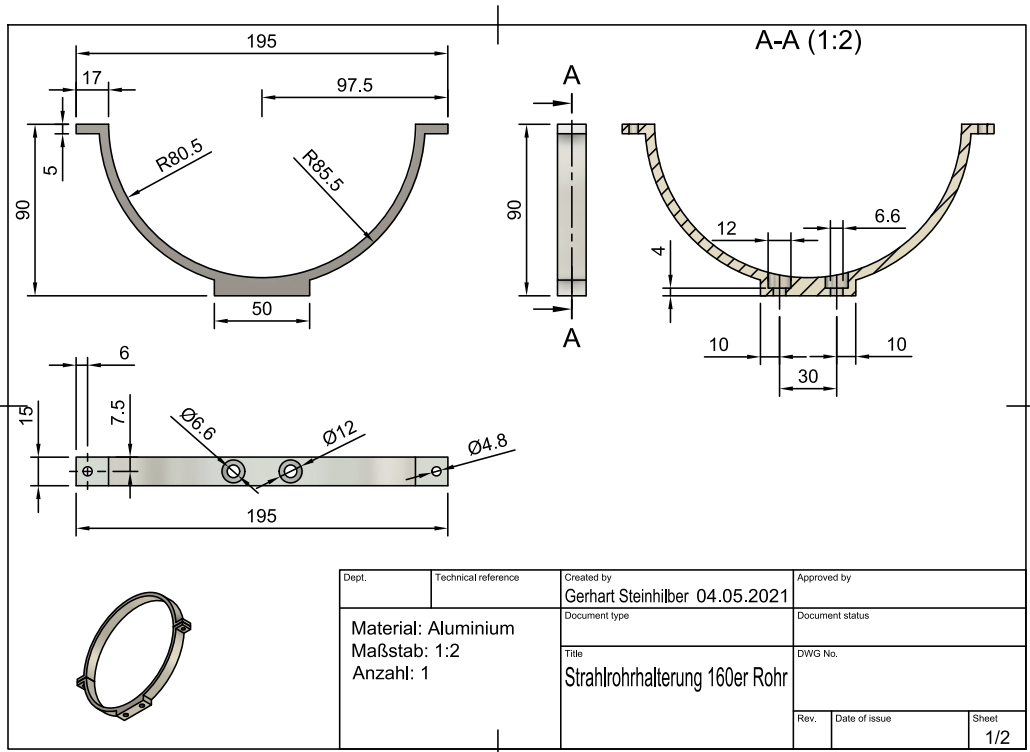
Technical drawing of the lower half of the large beam pipe holding clamp.
